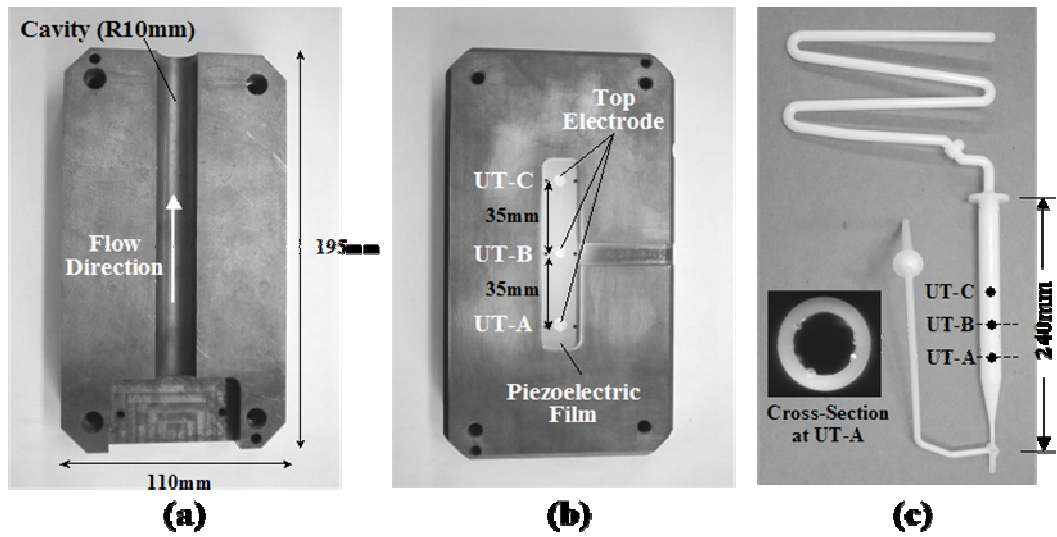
Photographs of (a) polymer side of mould insert having a half cylindrical cavity with a radius of 10mm, (b) three HTUTs (UT-A, B, C) fabricated on opposite side of the cavity, and (c) a moulded part, with gas/water assisted injection moulding.
